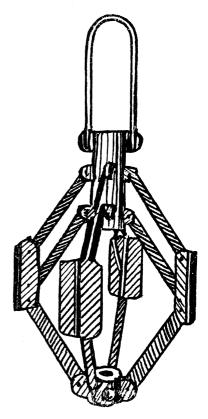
A quadruple expansion brace sold by the Alsdorf Corporation. The stock size is made to fit the Standard earth auger.
